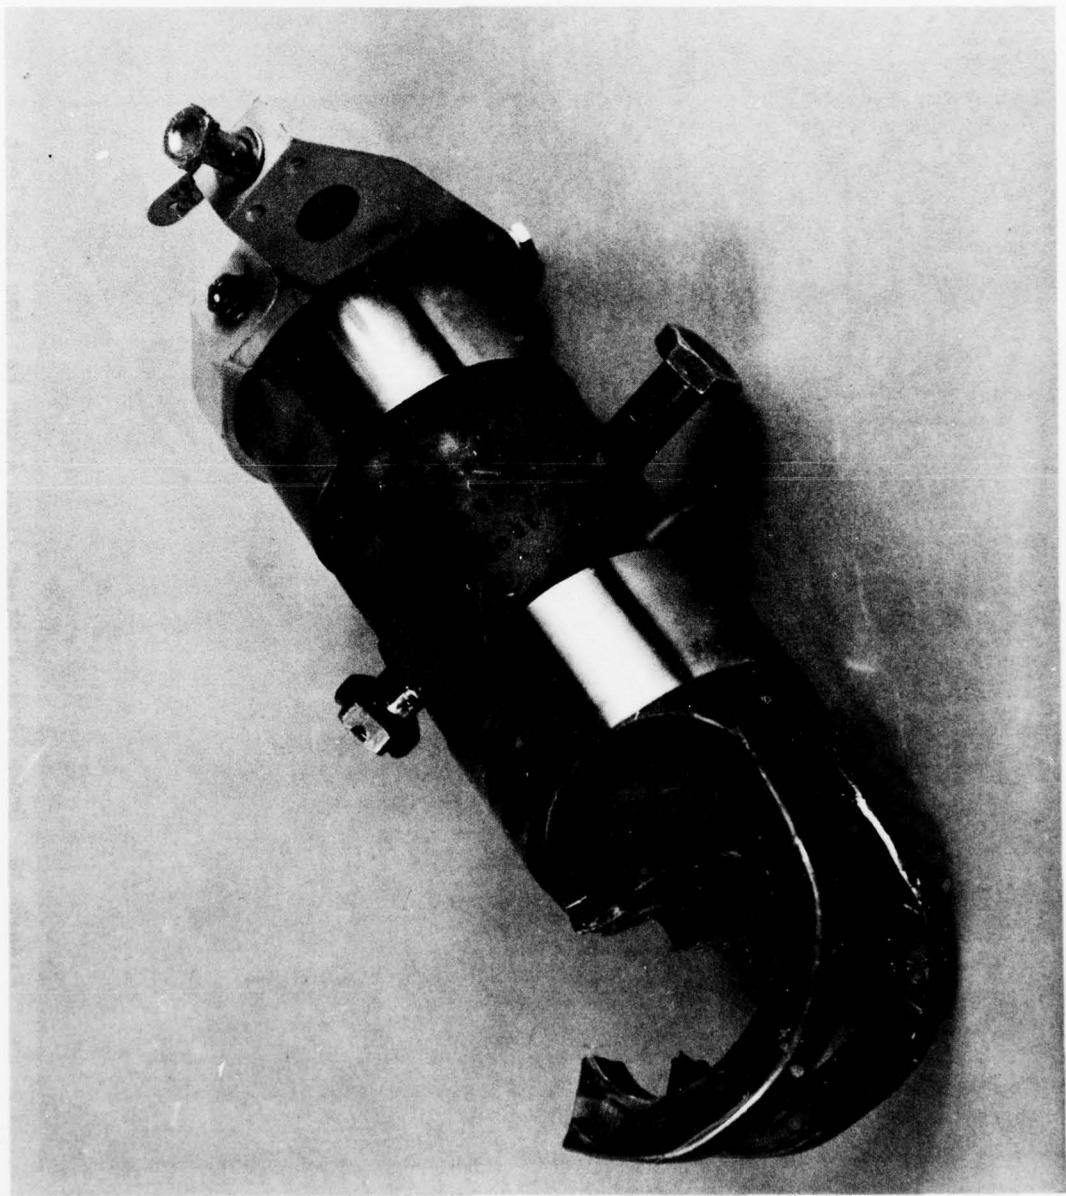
Socket Pin (Part No. 19062) After Failing Load Test
